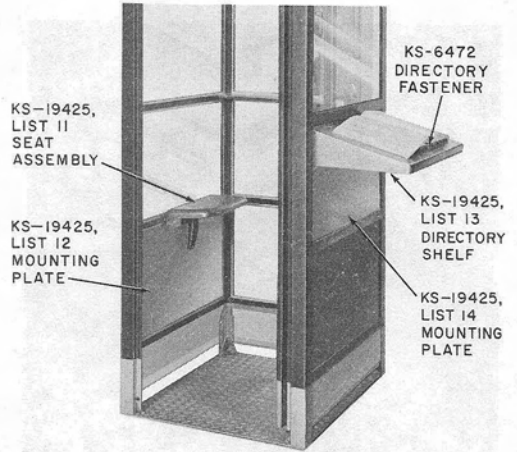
KS-19425, List 11 Seat Assembly, KS-19425, List 13 Directory Shelf and Associated Mounting Plates
